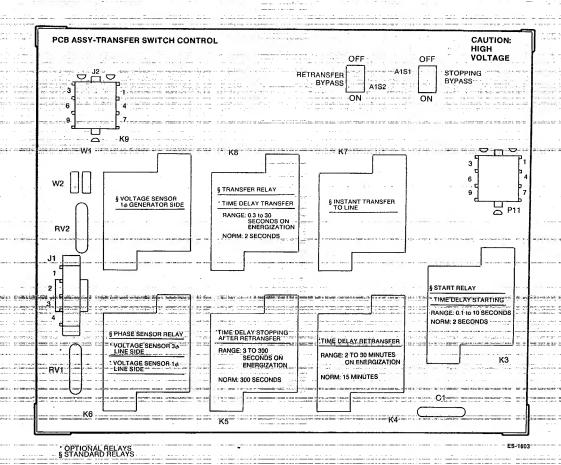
CONTROLLER PCB ASSEMBLY
